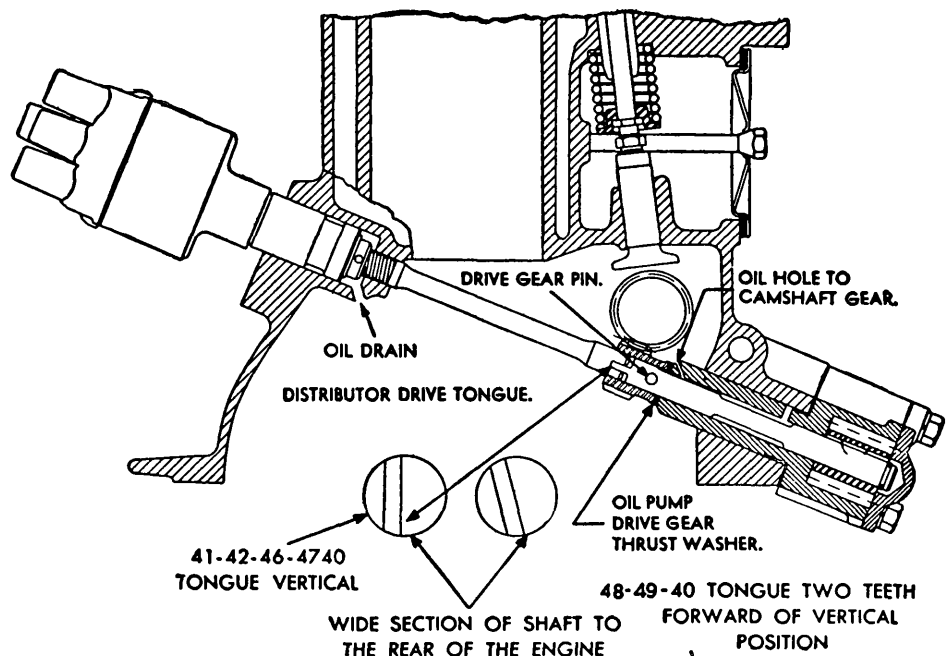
Oil pump and distributor drive. 1941-52 Series 10, 40
